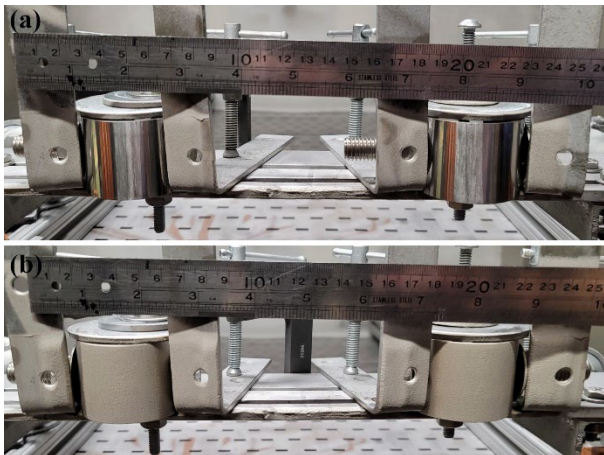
(a) Before and (b) after stainless steel Cold Spray Deposition.
